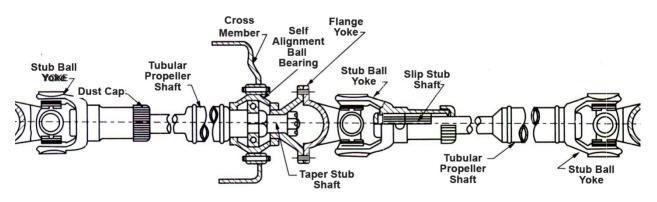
Two-piece Propeller shaft with self alignment Centre Bearing.
